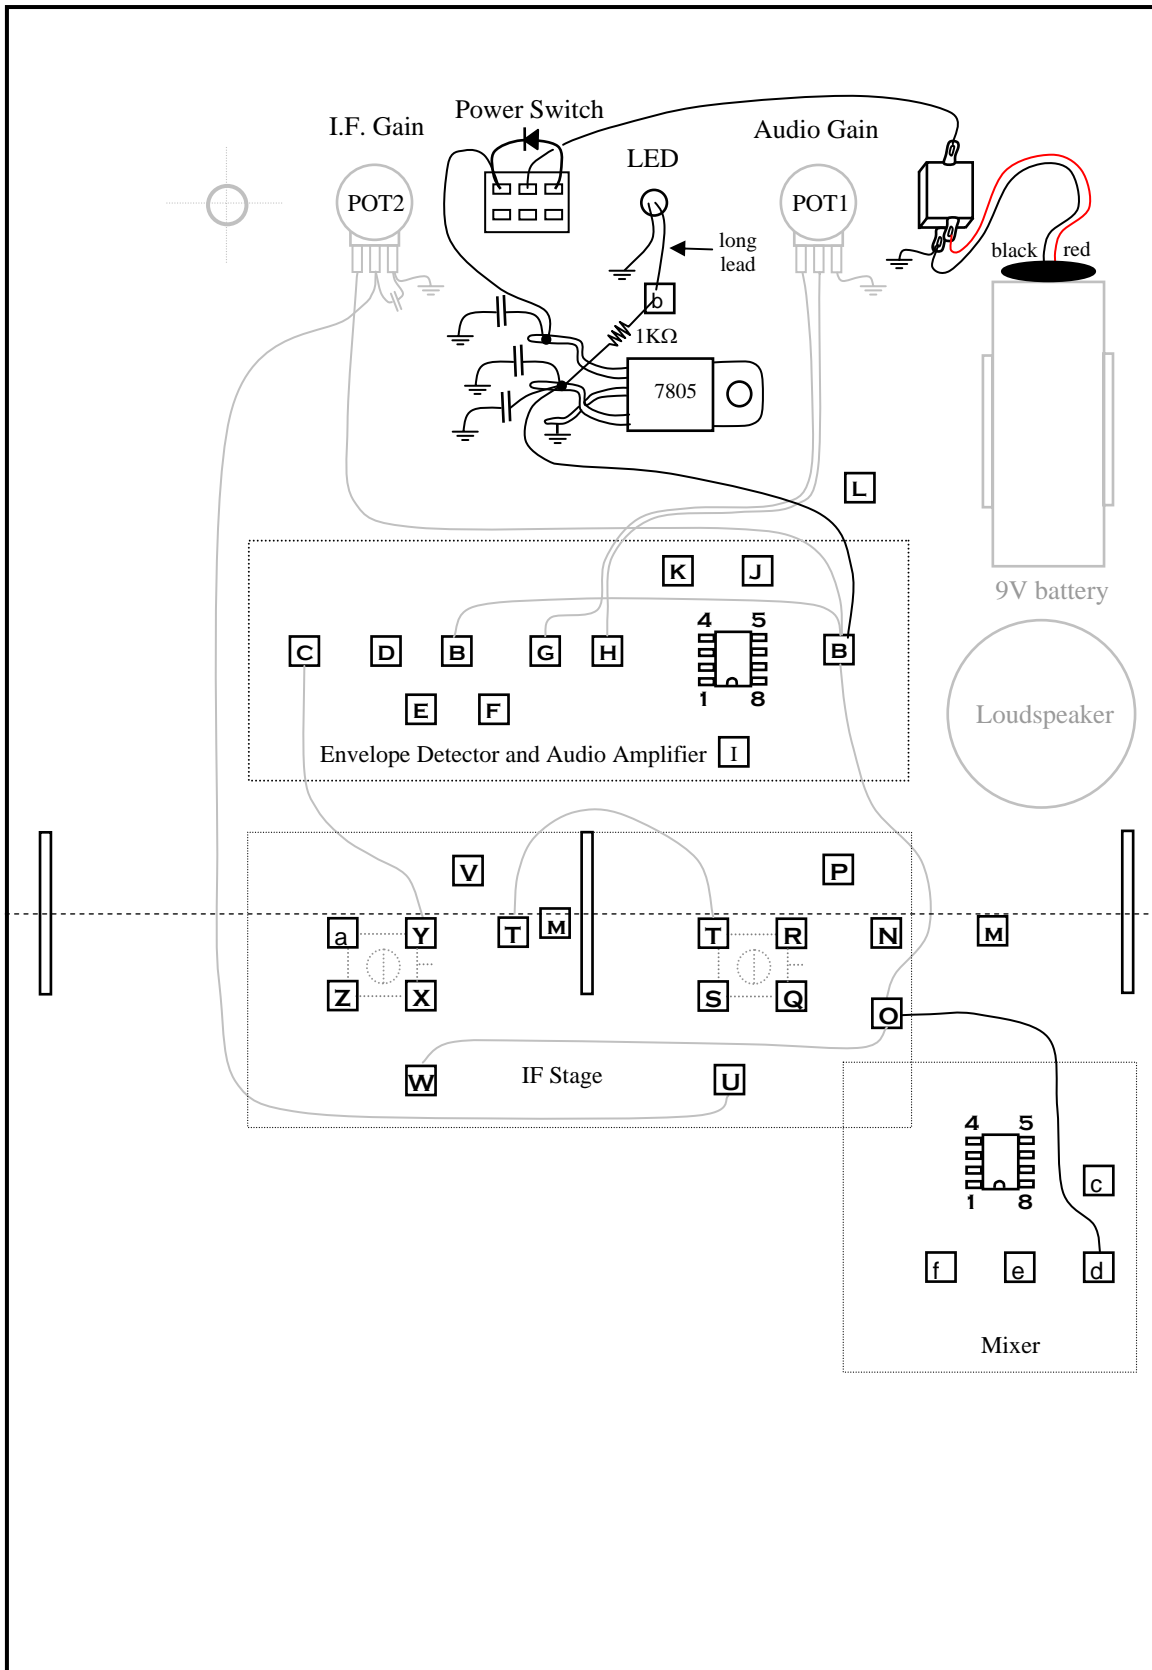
Mixer and voltage regulator stage layout areas and solder pad locations.
